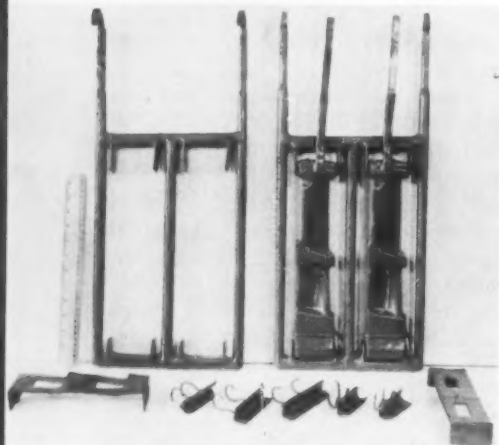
View showing baffle plates, clips and racks used for electro-chemical machining.
